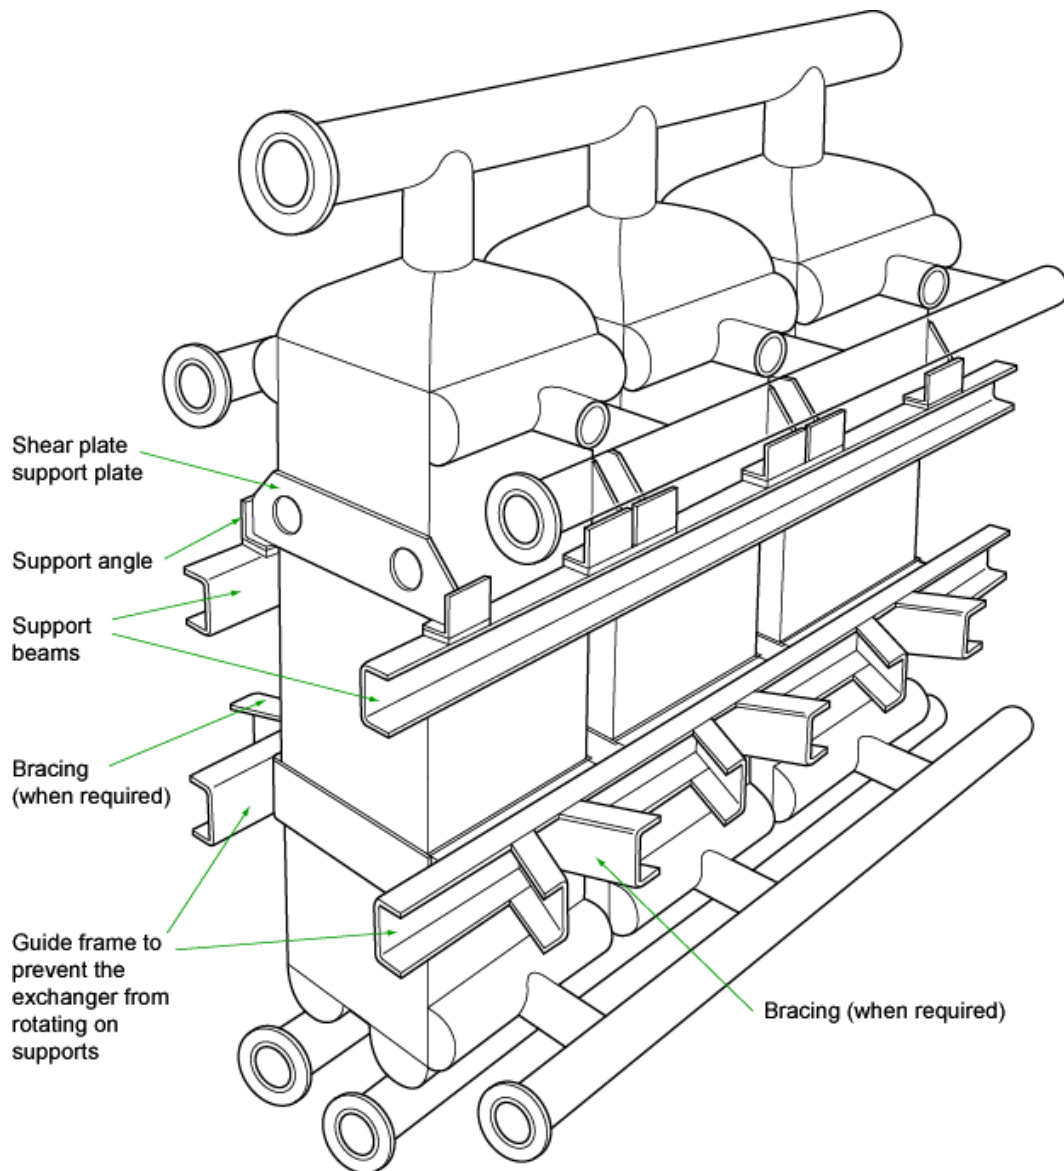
Typical heat exchanger assembly of three cores showing shear plate supports
